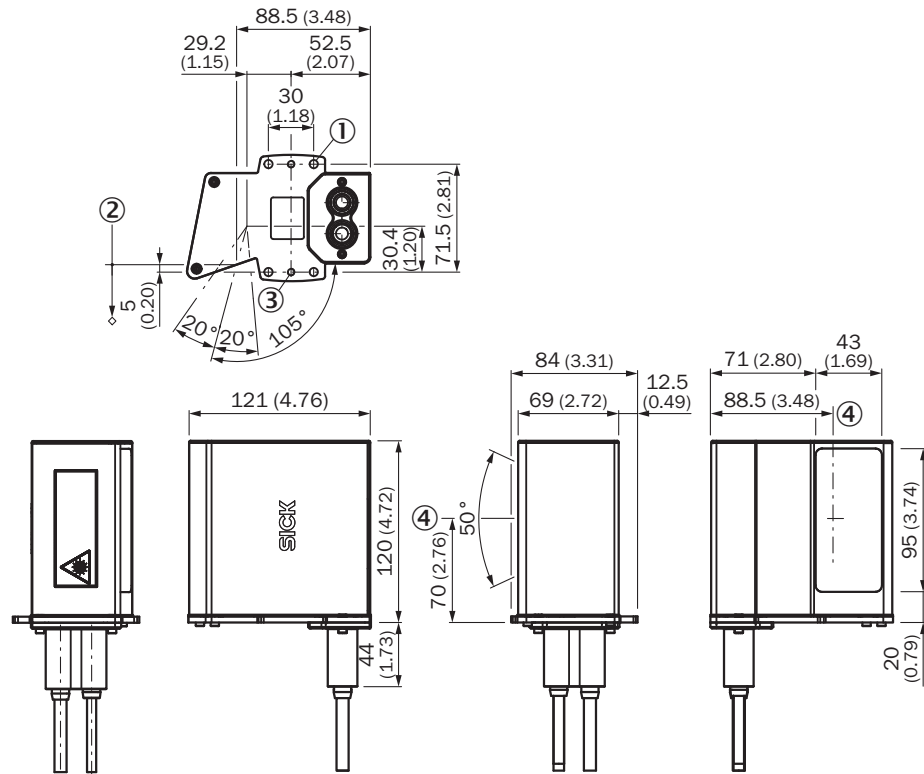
CLV63x / CLV64x with oscillating mirror: design and device dimensions of the IP69K protective housing, side reading window (dimensions in mm or inch)
